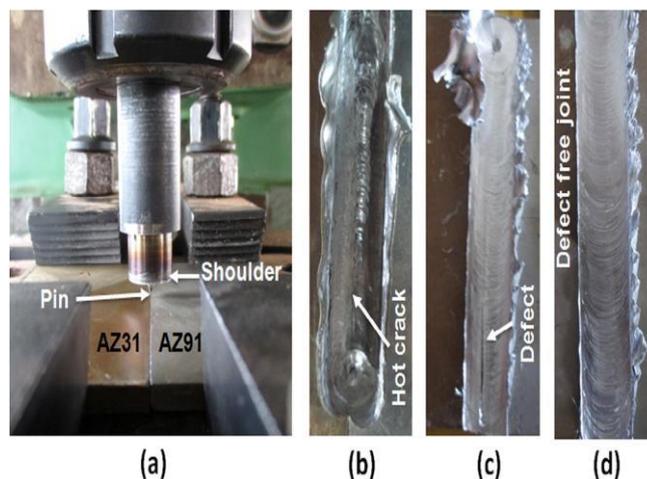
(a) FSW set up for joining AZ31 & AZ91 Mg alloys, (b) appearance of hot crack just after welding, (c) joint with tunneling imperfection (d) defect free joint [17].
